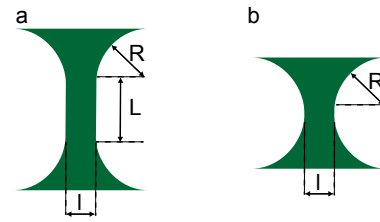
Flexible hinges. a) corner-filletted flexible hinge, b) circular flexible hinge.
